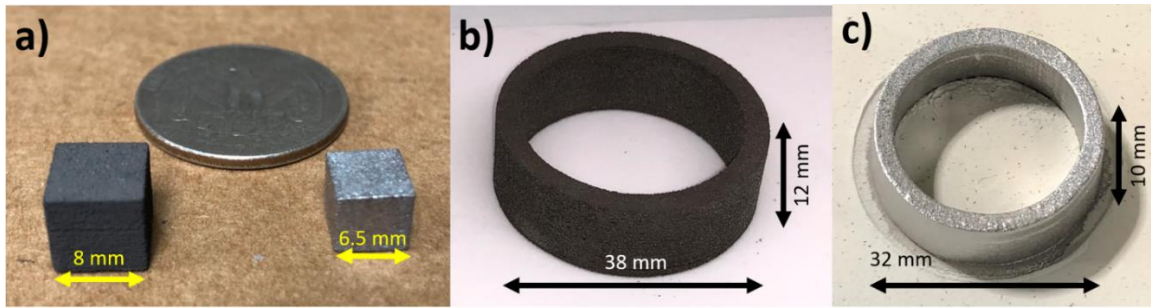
a) printed cube (left) vs a sintered cube (right) b) As printed ring sample c) Sintered ring sample
